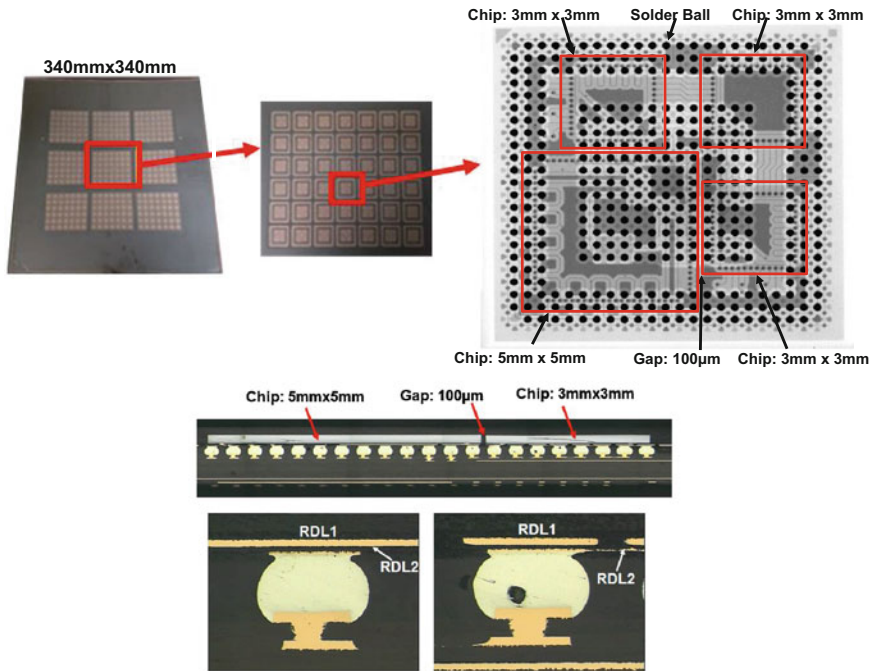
Cross section of the PCB assembly of the test package with RDL1 and RDL2
